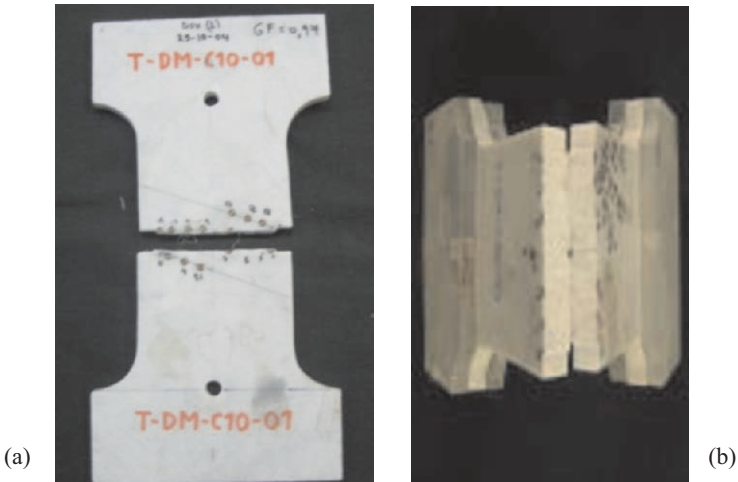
(a) A typical fractured specimen with U-shaped notch and the first arrangement of strain gauges. (b) Fracture surfaces of a U-notched specimen with reinforced gripping zone.
